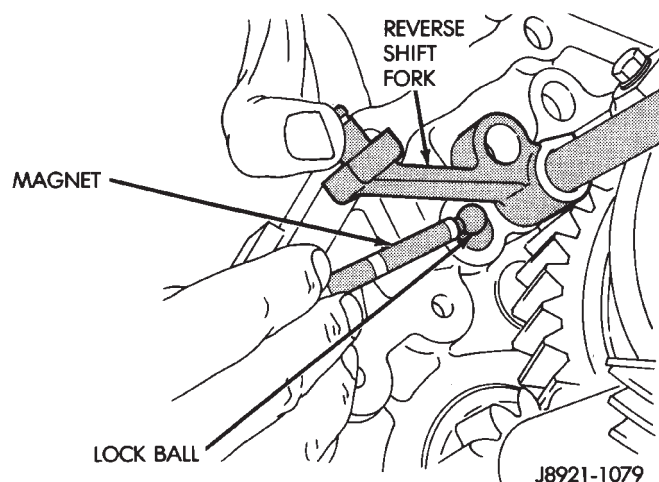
Fifth Gear Shift Rail Lock Ball Removal
